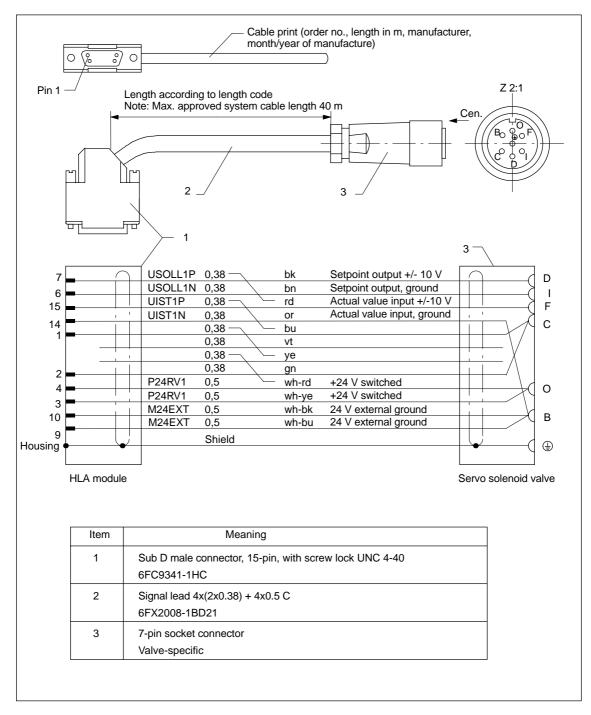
Interconnection diagram for 7-pin servo solenoid valve (X121/X122) - connection option 2 (customized)
